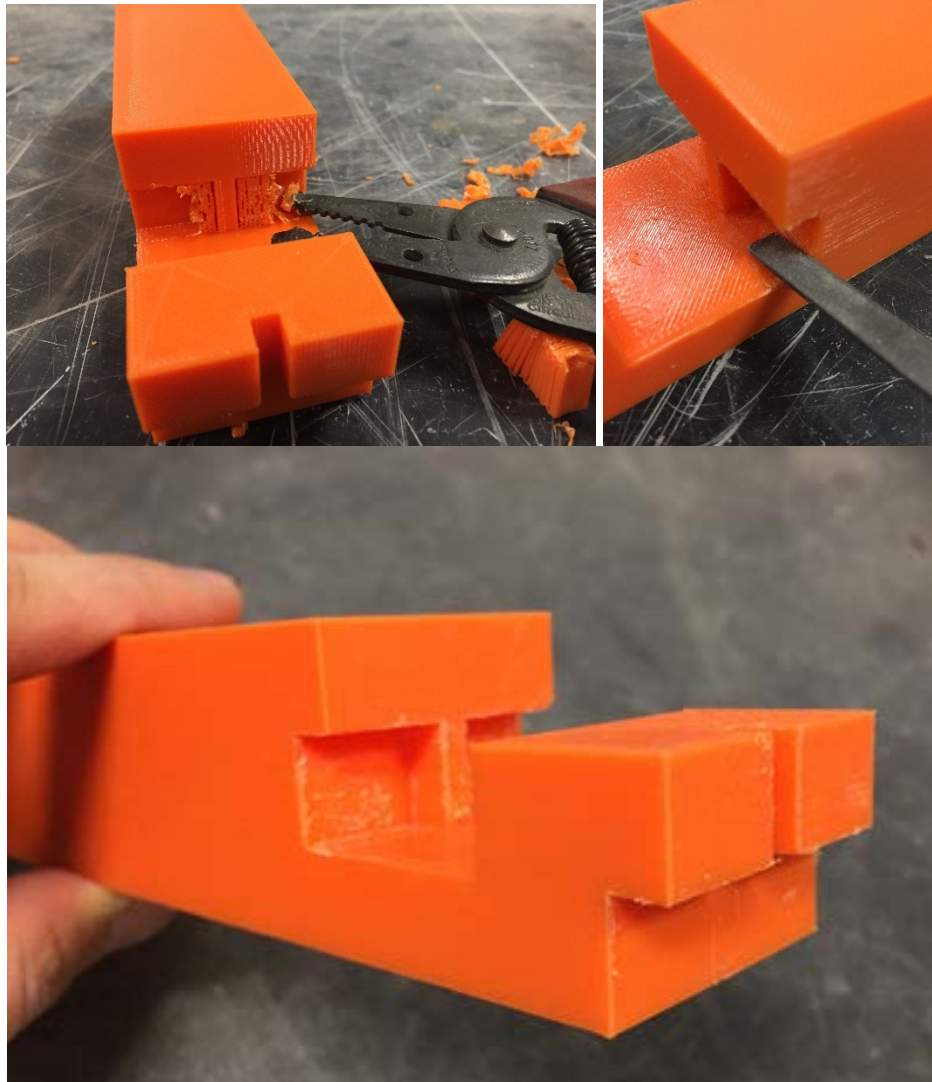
After the specimen was printed, the supports were removed using a pinch off tool (top left) and the rugged parts were smoothed using hand tools (top right).
